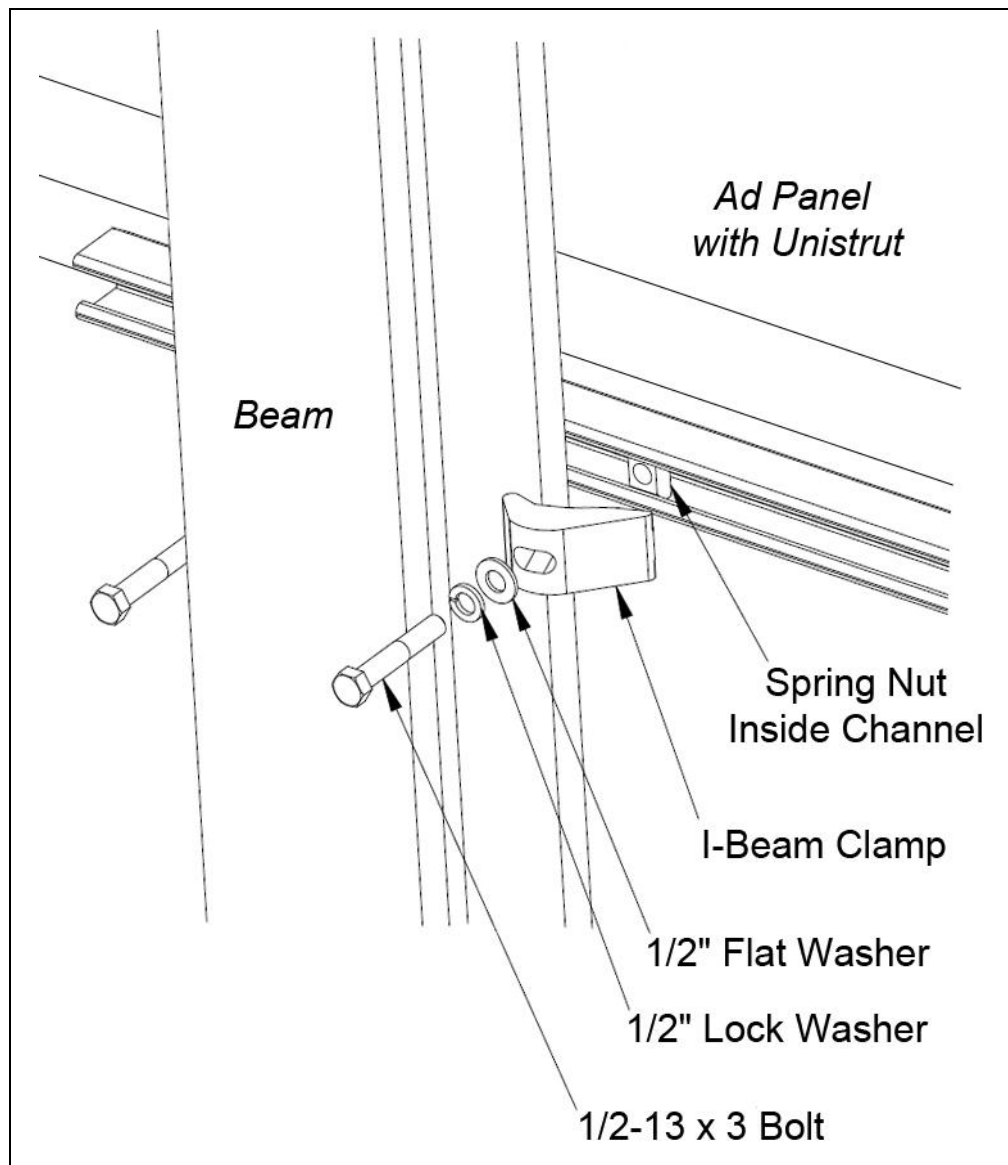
Ad Panel Mounting with I-beam Clamps, Rear Isometric View
